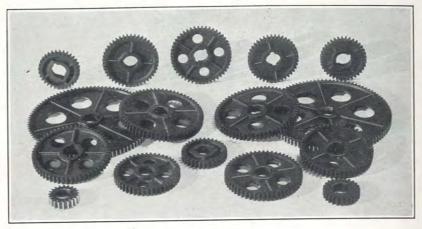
Sixteen gears are furnished with each Atlas Lathe.
